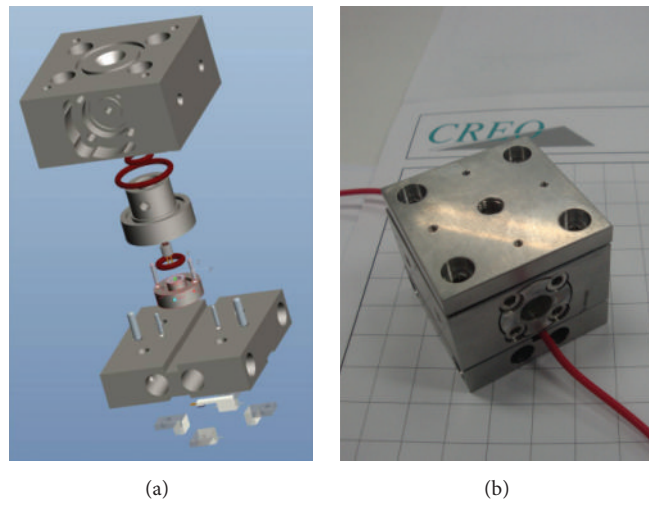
Optical cell: exploded view of the cell design (a) and picture of the optical cell assembled, also showing the top lid for interfacing with a sampling unit (b).
